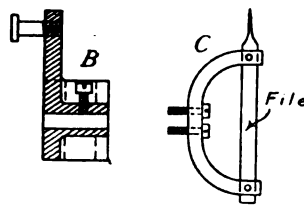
TOOL-HOLDER FOR KEYWAY CUTTING
